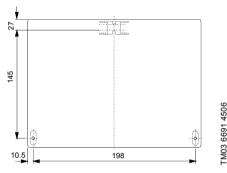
Wall-mounted enclosure Conex® DIA-2Q
